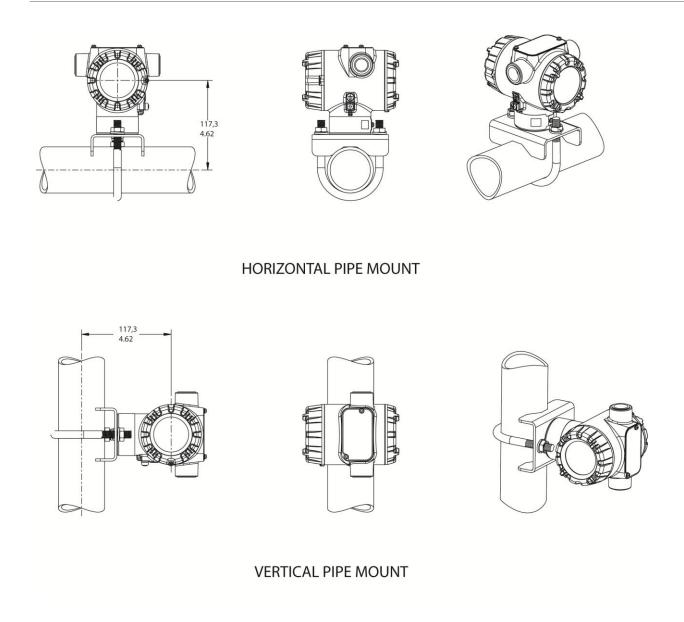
STT850 Pipe Mount housing - Horizontal & Vertical
